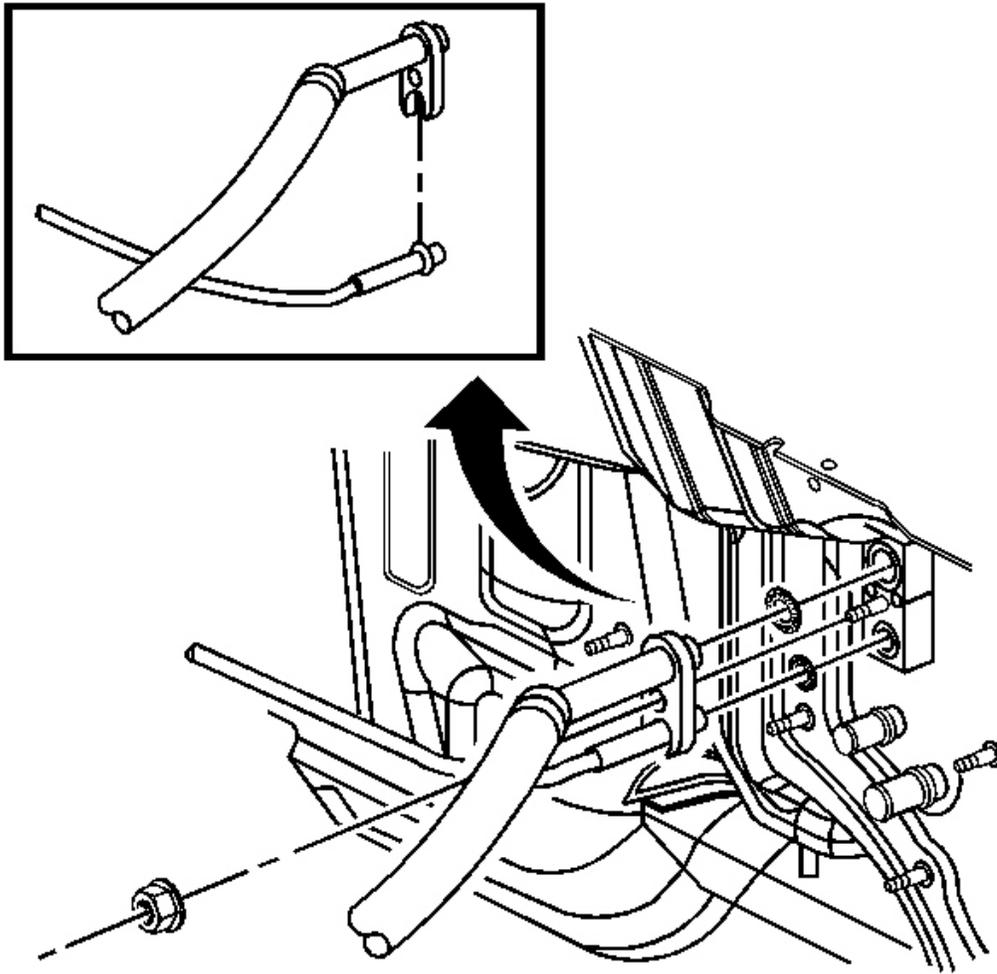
View Of Evaporator Tube & Compressor Suction Hose At TXV
